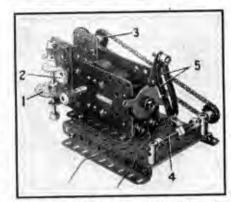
A novel automatic reversing mechanism for an E26R type Electric Motor.
